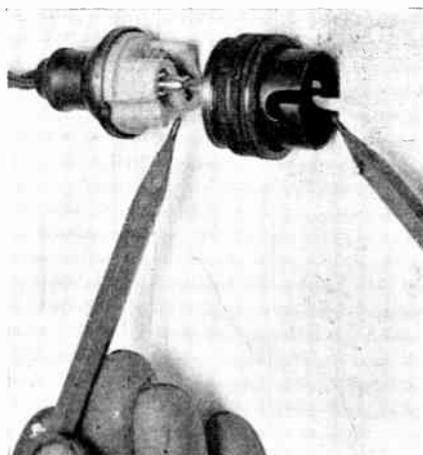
ASSEMBLING THE LAMP-HOLDER.
